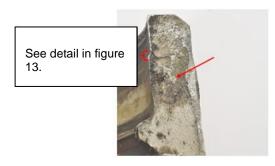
Close-up of the inner wheel half hub fracture surface (2).
